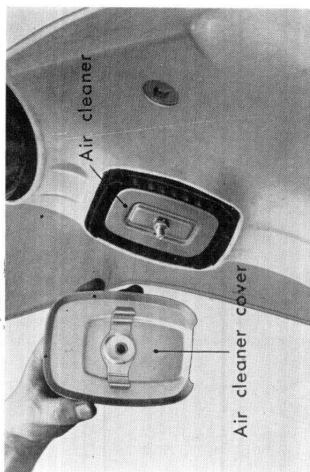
Removing air cleaner (C50, C50M, C65, C65M)
